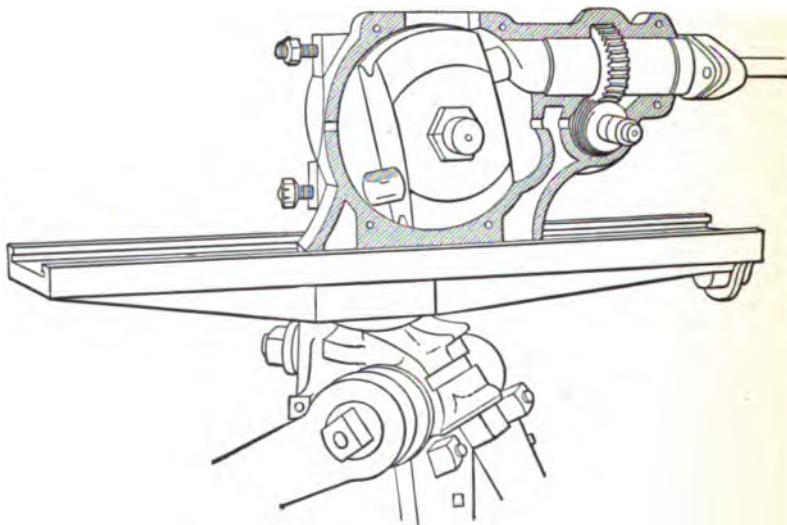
Electric revolving hammer drill with motor and part of casing removed.
